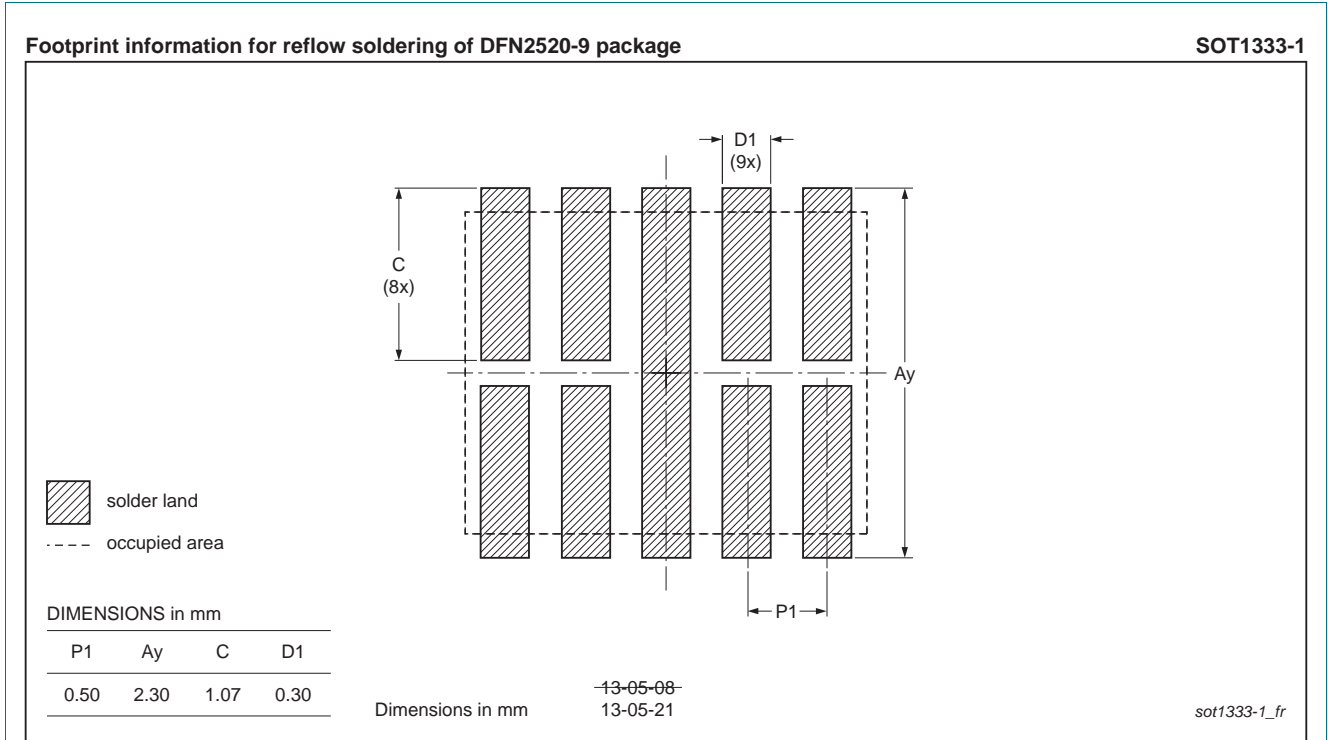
Reflow soldering footprint DFN2520-9 (SOT1333-1)
